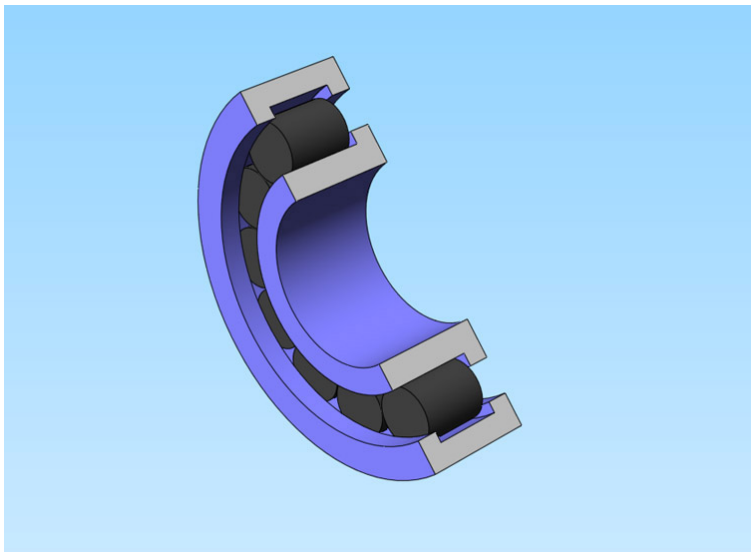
SolidWorks model of a FAG cylindrical roller bearing in cross section
